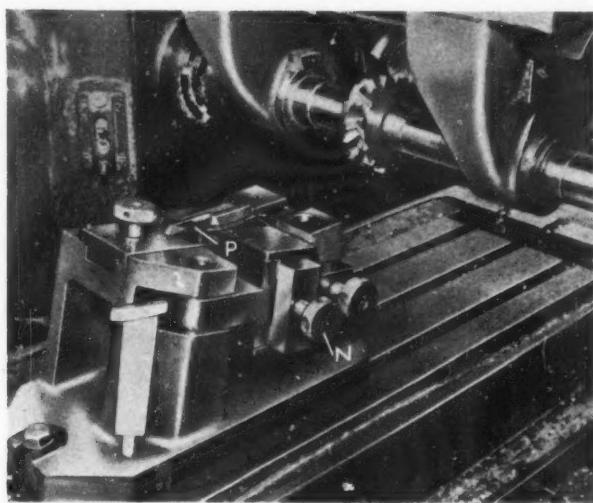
A Werner Horizontal Milling Machine is Employed for Milling the Sides of the Root End, to an Included Angle of 30 deg. for the Example Shown, with a Pair of Matched Angular Milling Cutters
